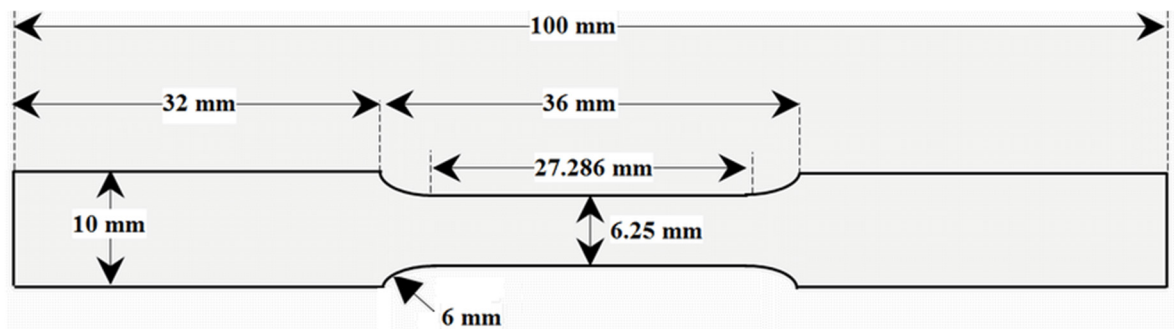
ASTM E8 – sub size tensile specimen dimensions
